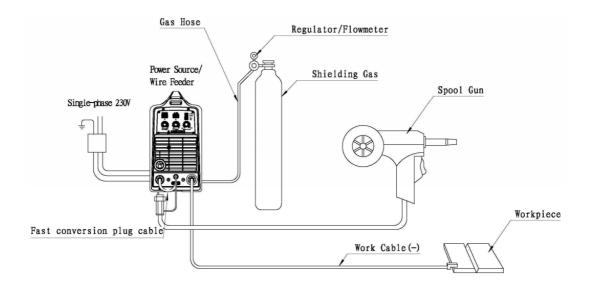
Installation - MIG/MAG with pull torch
